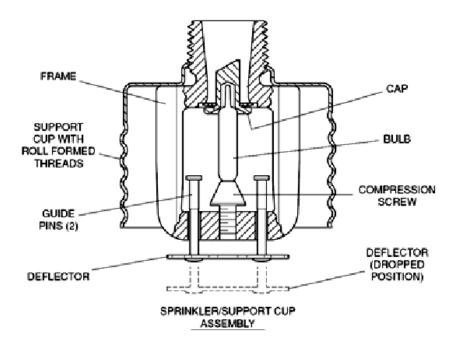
Typical sprinkler assembly of concealed sprinkler (Taken from Tyco Fire & Building Products 2014)
